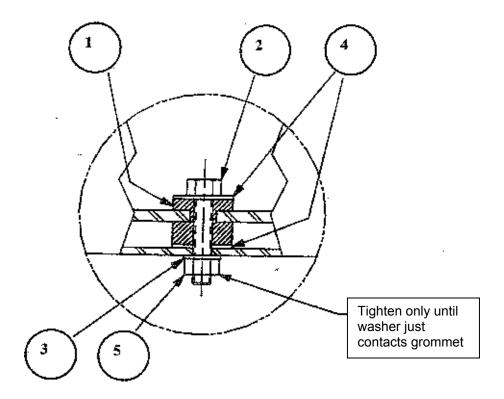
Discharge/Vacuum Pump Assembly and Lower Frame Mounting Detail
